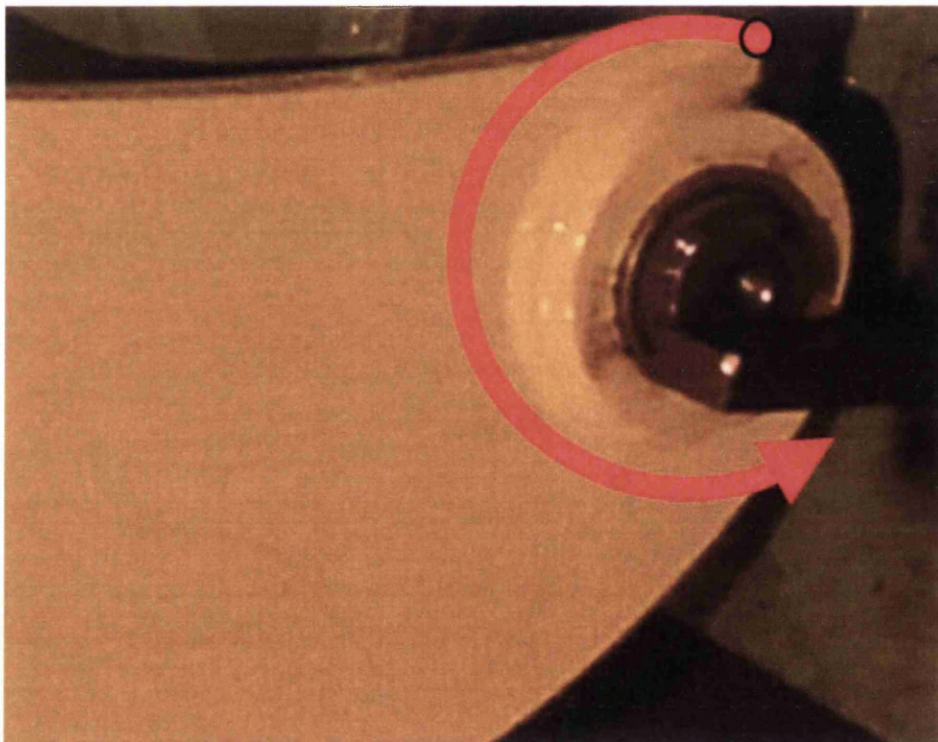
Lock lug weld toe - Structural stress profiles for slew and excavating load
